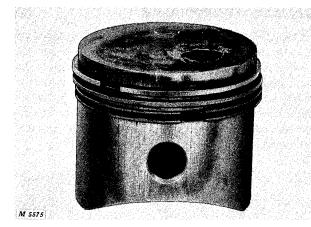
Hole Burned in Piston Caused by Pre-Ignition
